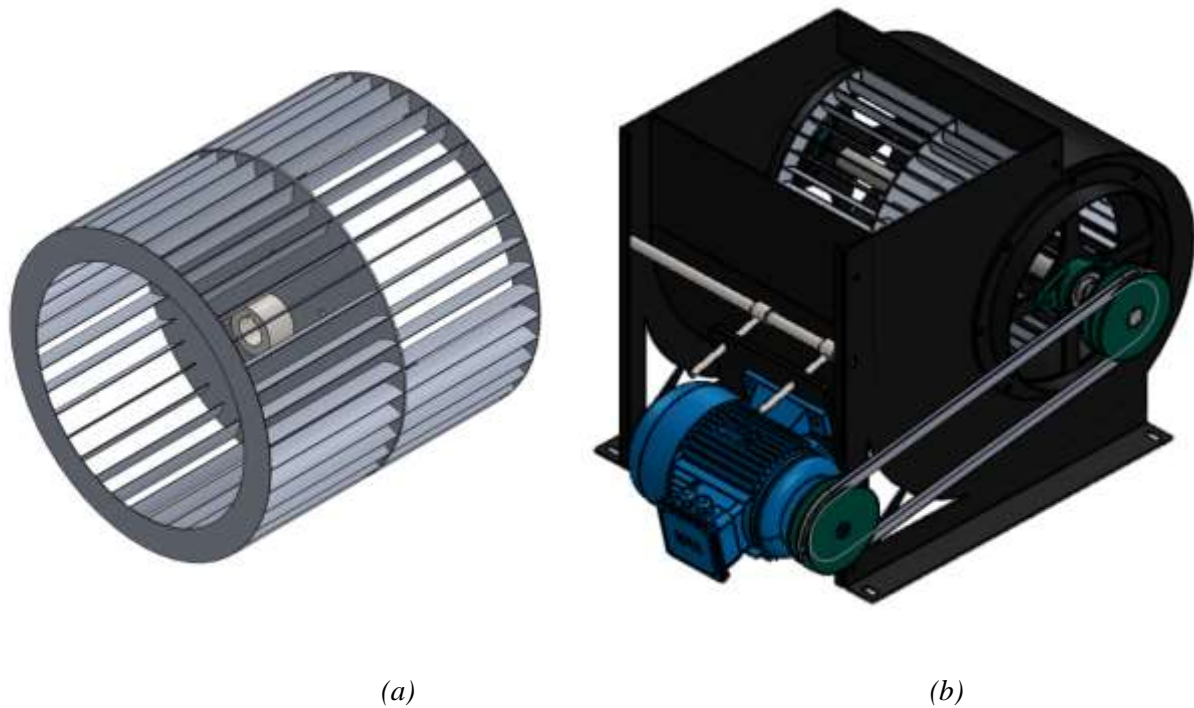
(a) 3D image view of the radial fan and (b) Assembly view of the radial fan and motor
